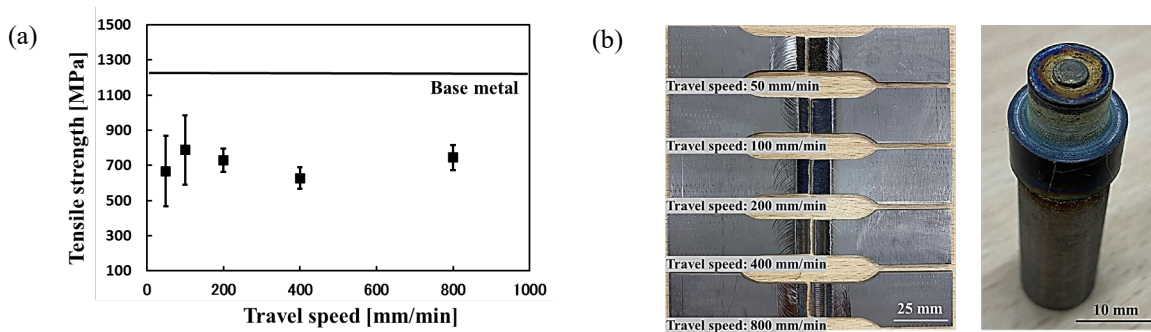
(a) Relation between tensile strength and FSF tool travel speed (Perpendicular to the direction of processing) (b) Fig. 12 Tensile tested specimens (left) and tungsten tool after FSF (right)
